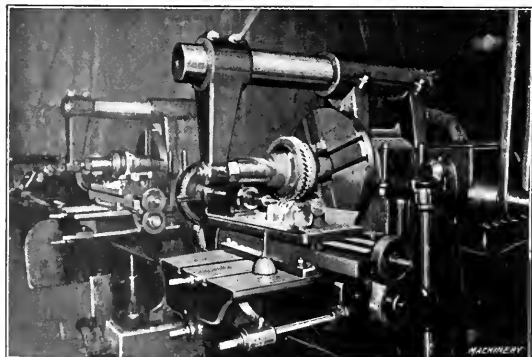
Two Special Hobbing Machines at work on Worm-wheels for Electric Automobile Rear Axle Drives
